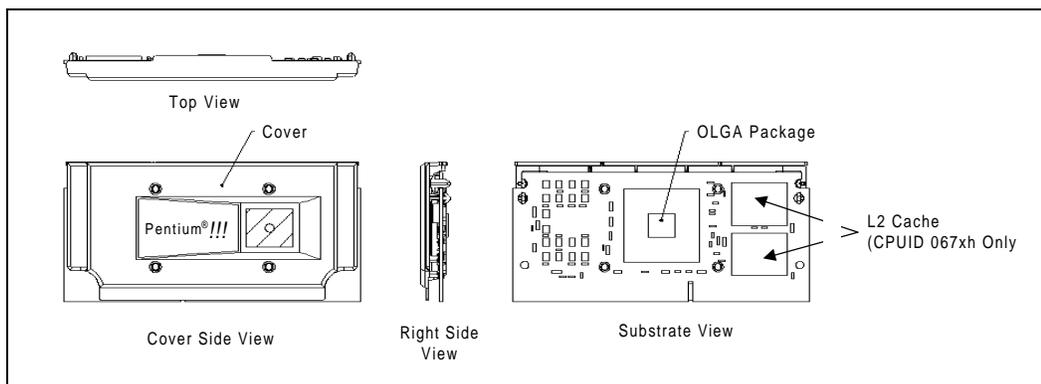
S.E.C.C.2 Packaged Processor Assembly — Primary View
